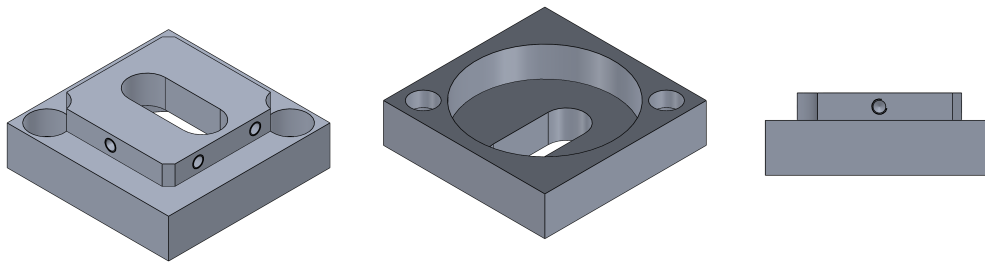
The upper connection piece that connects the main knee cylinder to the upper square tube
